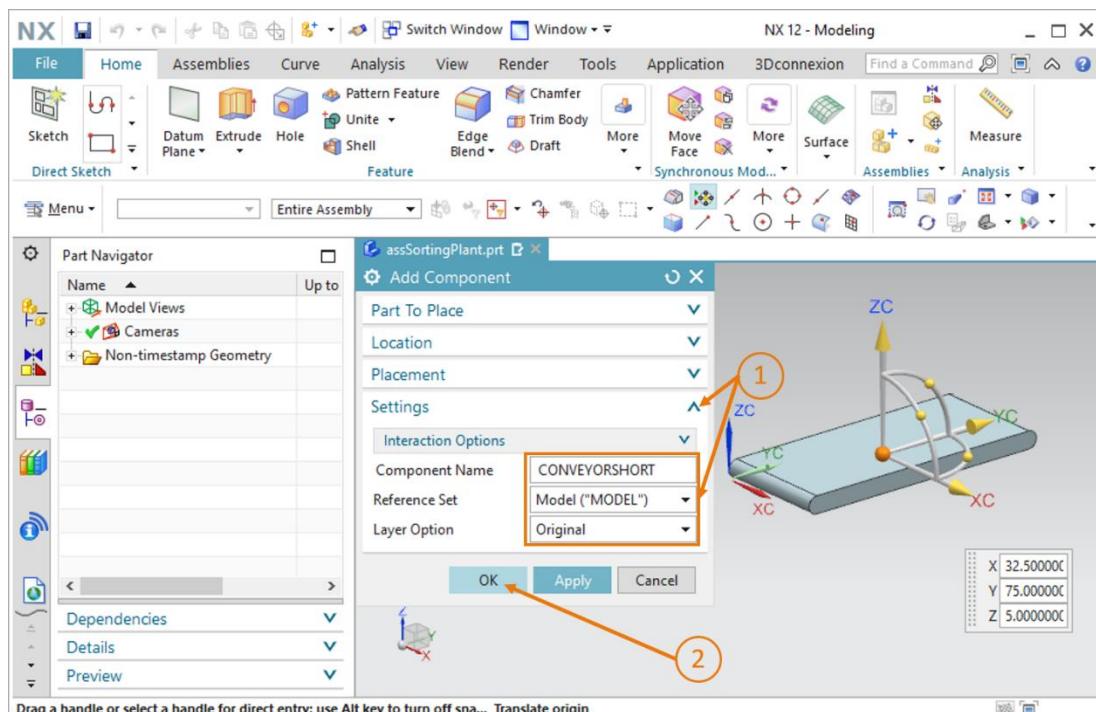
Adding the "conveyorShort" model to the assembly – Settings
